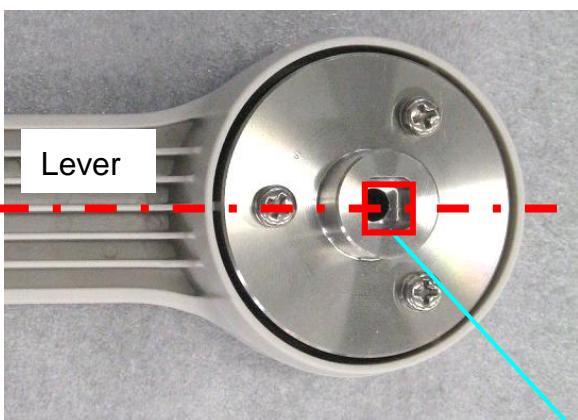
Removal of Mounting for Retort Lid Lever
